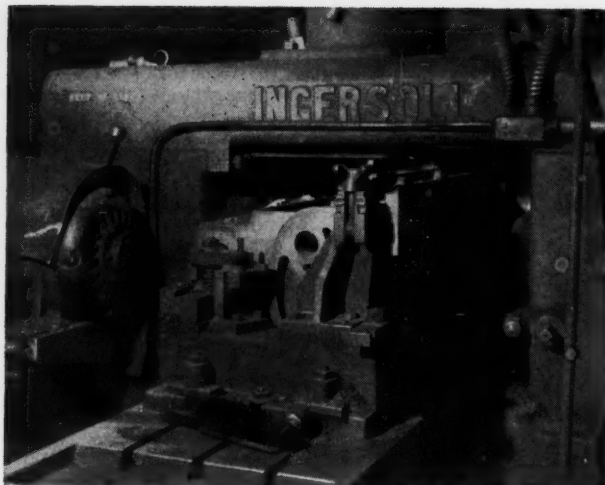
Machining the top, bottom, and one side of a Buda engine block. Two cutters—rougher and finisher—are used on the top and the same on the bottom.
